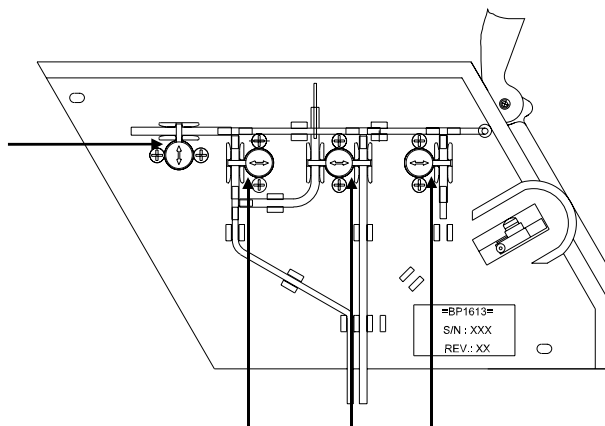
Solenoid valve relief clamps - Fill port module C1 (AVL COMPACT 1 to SN 1000)
